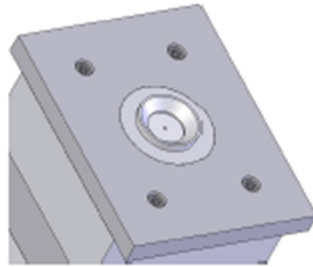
Assembly of Centring ring and sprue bushing with mould (DS, Standard Components, 2008)
